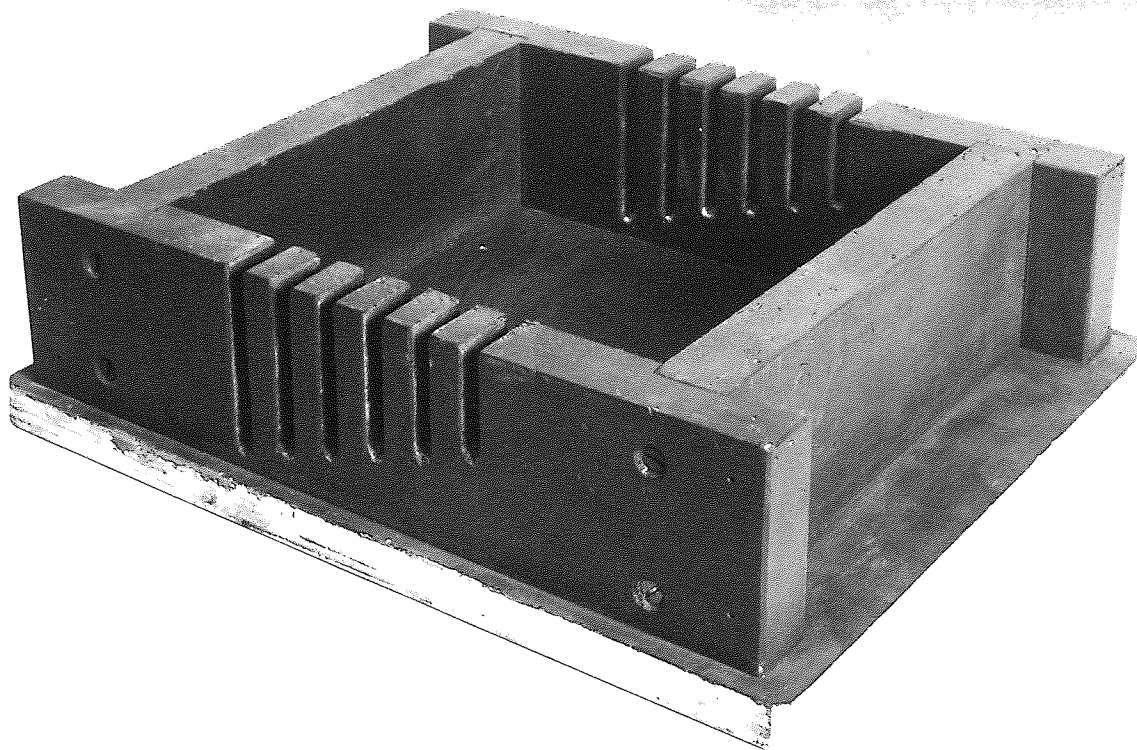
Moulding box to assist thermocouple location in the sand block.
